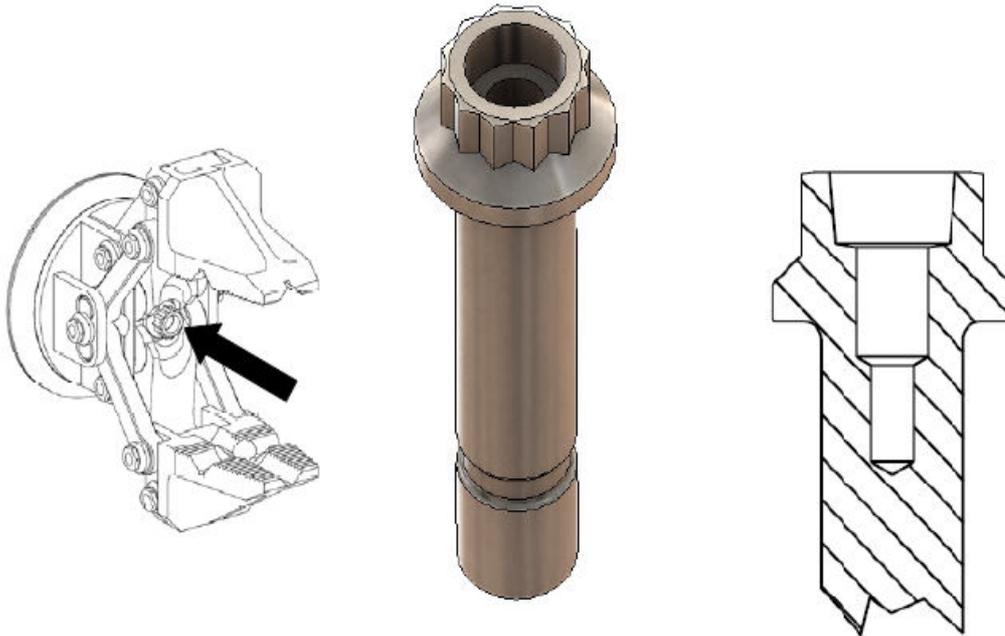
Fuse-type jaw bolt: location (left), machined hole in head (center, right)
